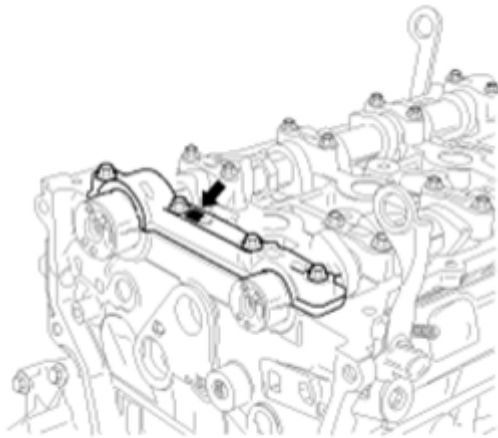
Identifying Cylinder Head Bore Identification Mark
